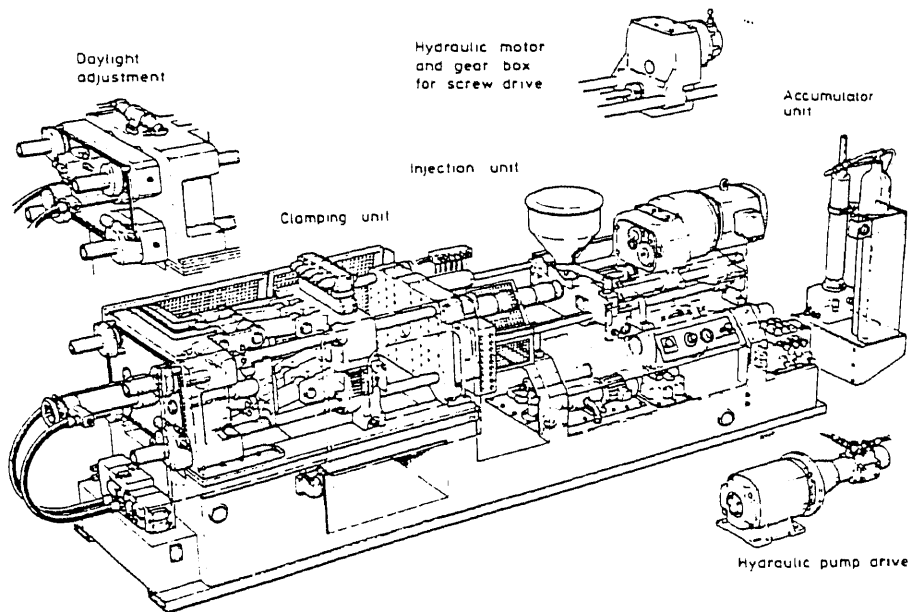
A typical injection molding machine. Reproduced from F. Johannaber, *Injection Molding Machines*, Hanser Publish, New York, 1985, p.14.
